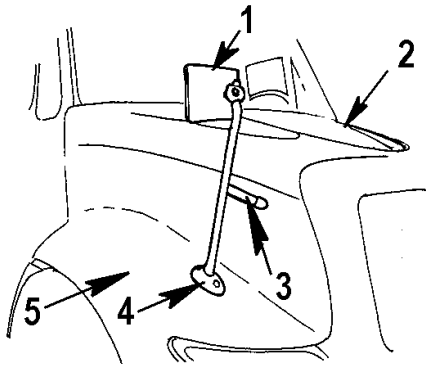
Fender Mounted Mirror (Passenger Side Shown)
